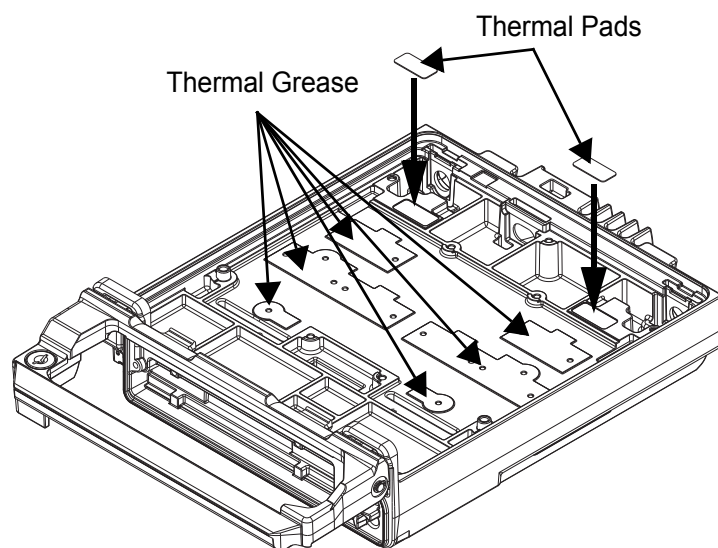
Inspecting the Chassis Shield Gasketing and Thermal Pads
